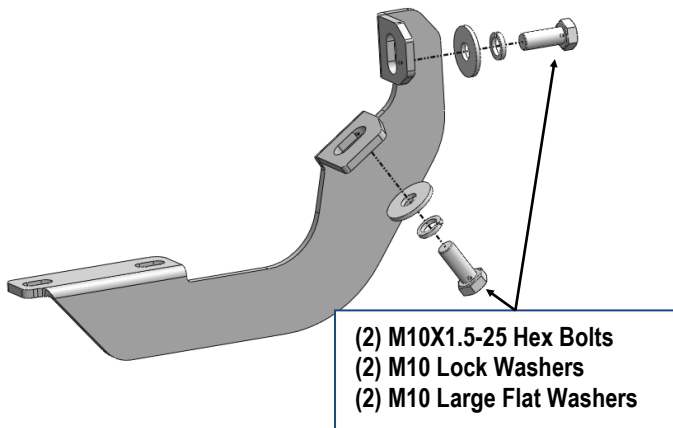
Passenger Front Mounting Bracket (PFM) Installed
